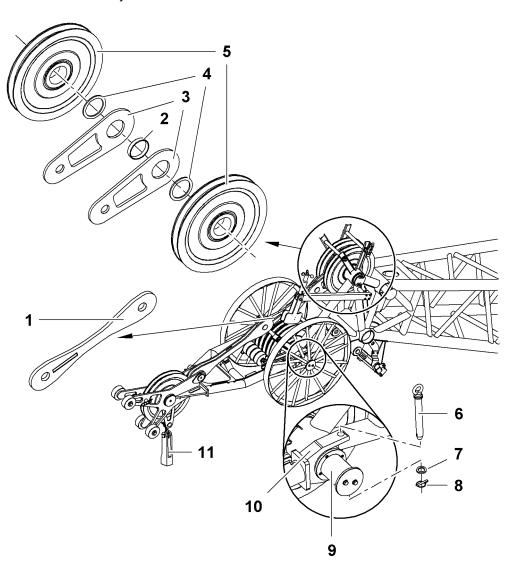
Attaching the auxiliary jib (66,000 lb) to jib head section 2316
